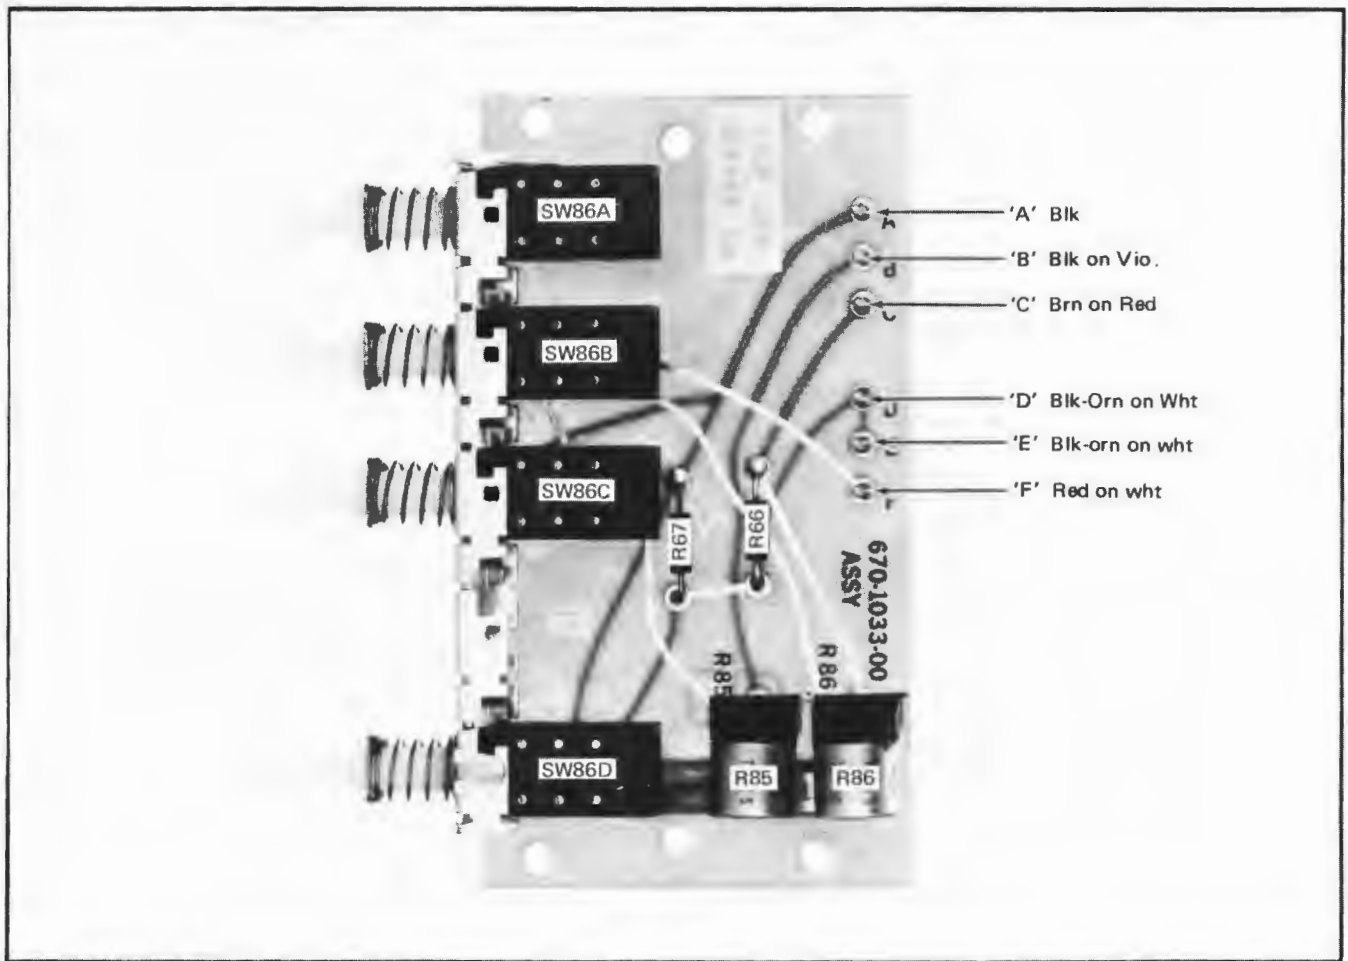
Component locations and wiring color codes on Step Gen Offset circuit board.
